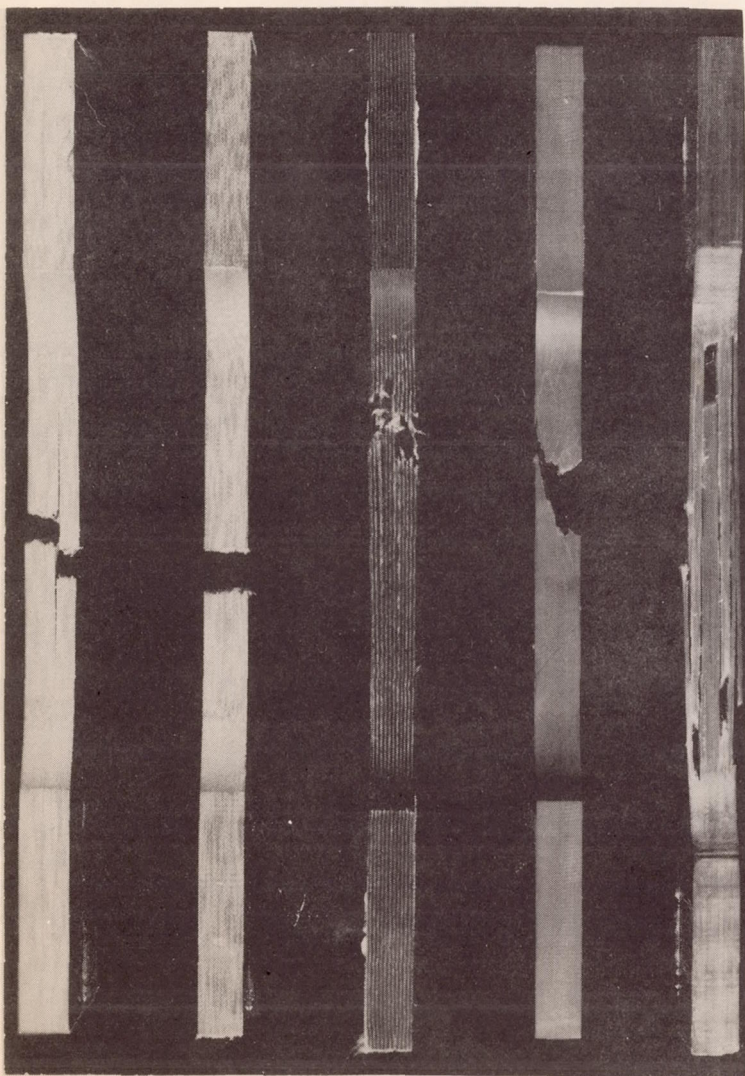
Static tension specimens showing type of fracture; left to right, materials CL, C, R, P and G.
